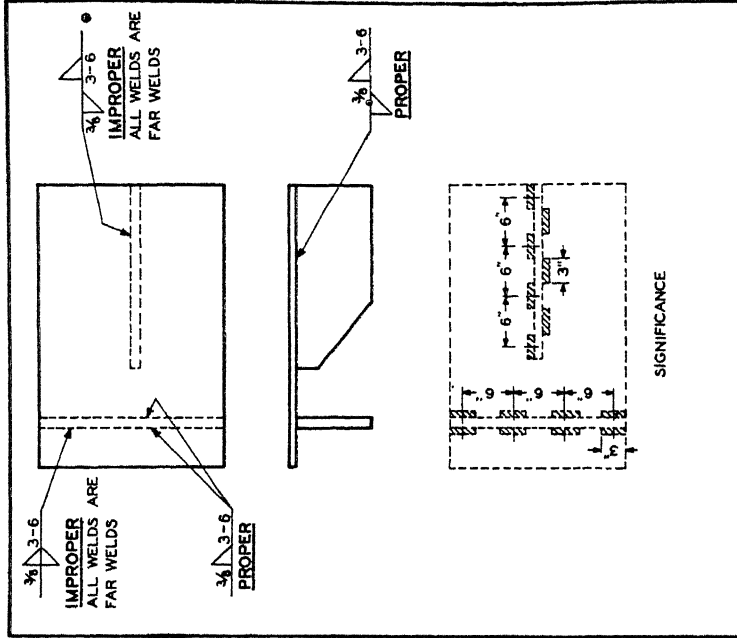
Examples of use of intermittent weld symbols.
